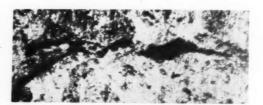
Appearance of ball bearing race failure. Magnification 136X
